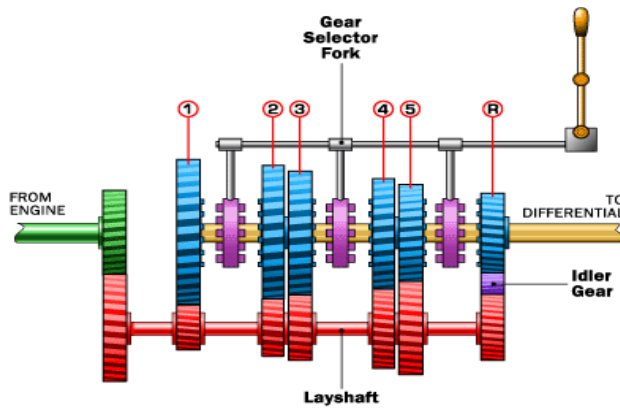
Explosion View of a Transmission System for Automotive (Harris 2006)
